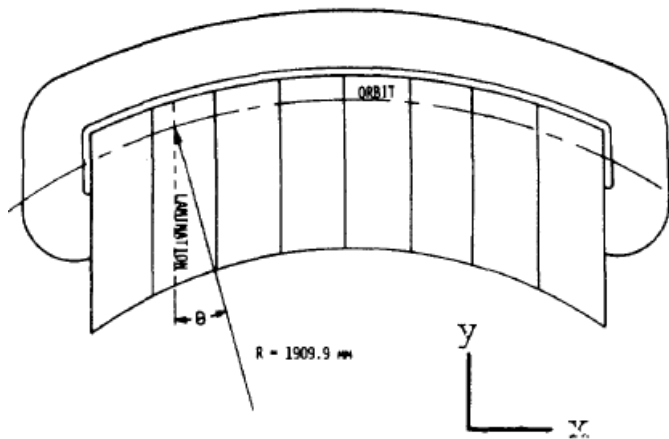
Top view of a VUV storage ring bending dipole [2].
